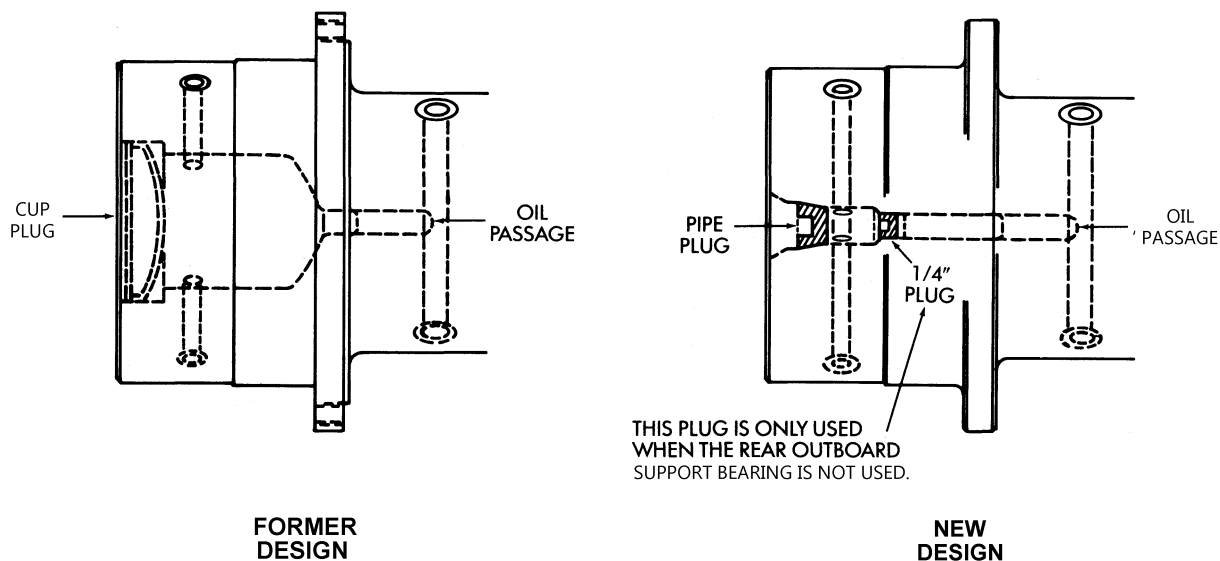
Former and Current Series 49 Engine Crankshaft End Designs
